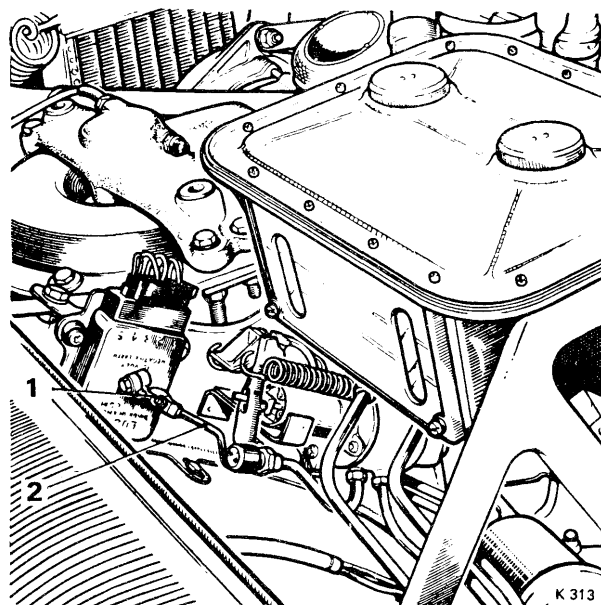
SUCTION THROTTLING VALVE ACTUATOR SETTING
